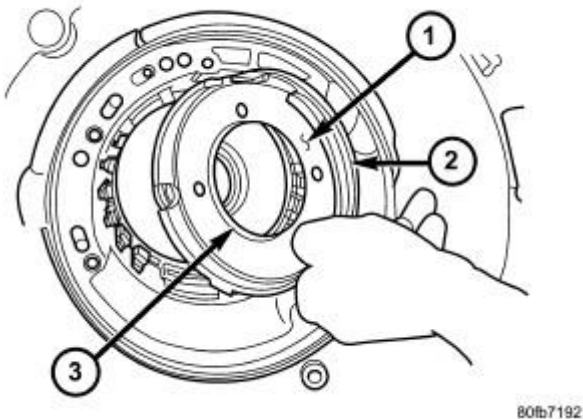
Remove/Install Low/Reverse Clutch Piston
